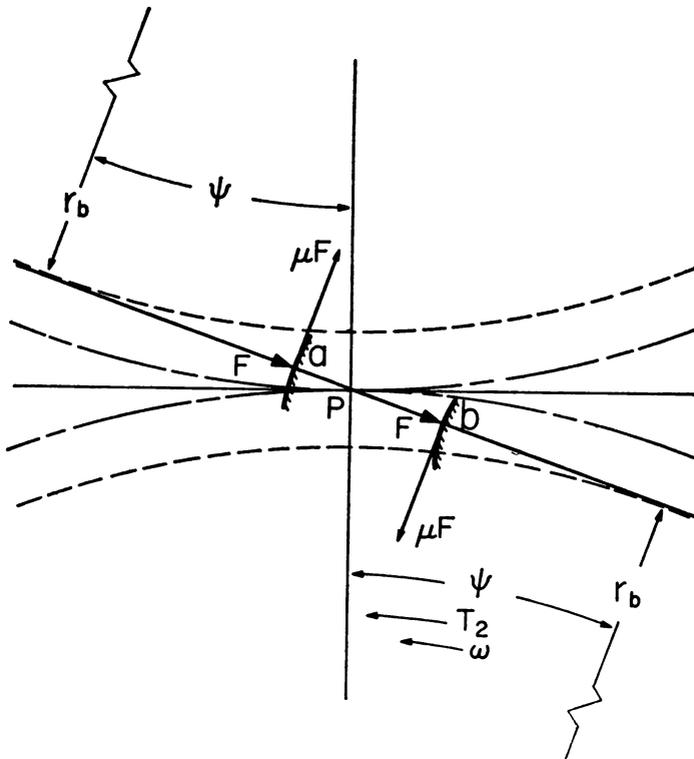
External torque and forces acting on a driving gear during Section I of the engagement cycle.
